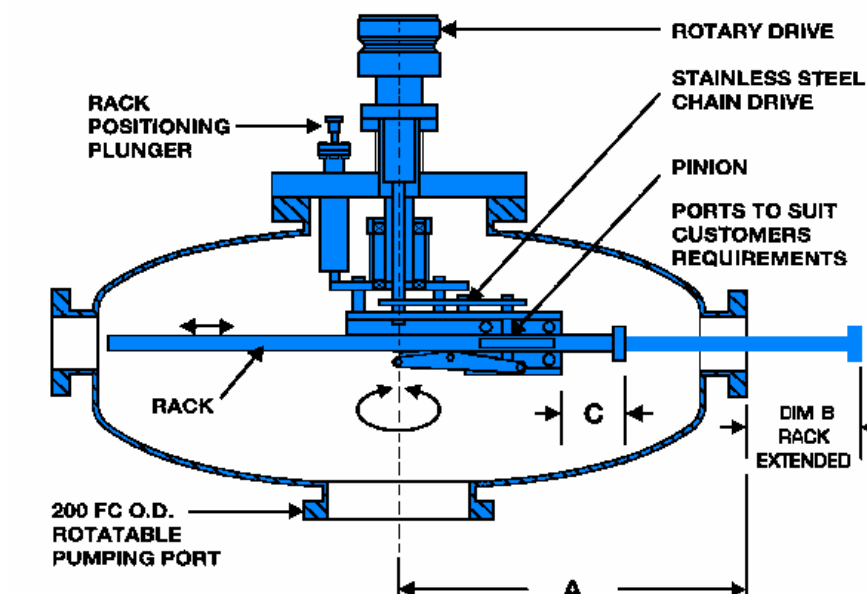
A drawing of the VG R2P2 radial sample transporter showing the movement mechanism in the vessel (Thermo VG Scientific).
